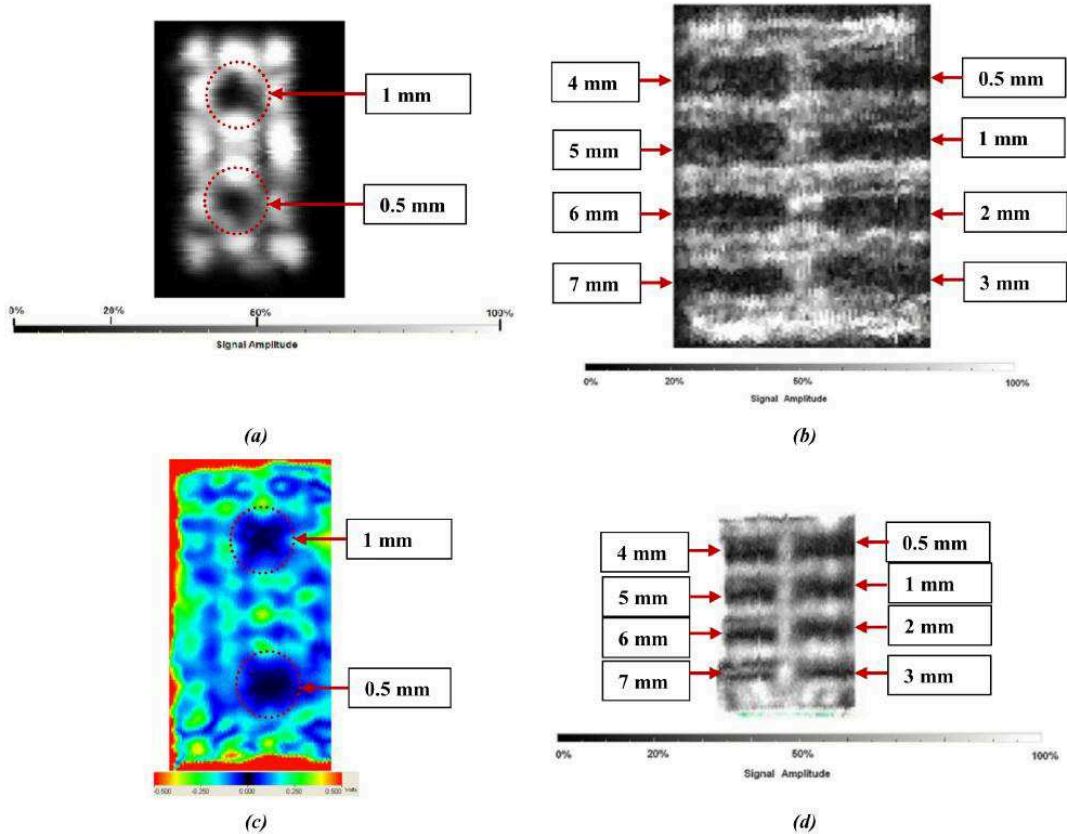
Air-coupled UT C-scan results of CAFS 3D C/C samples (a) 12.7 mm diameter flat bottom hole sample at 125 kHz (b) 12.7 mm diameter side drilled flat bottom hole sample at 125 kHz (c) 12.7 mm diameter flat bottom hole sample at 225 kHz (d) 12.7 mm diameter side drilled flat bottom hole sample at 436 kHz.
